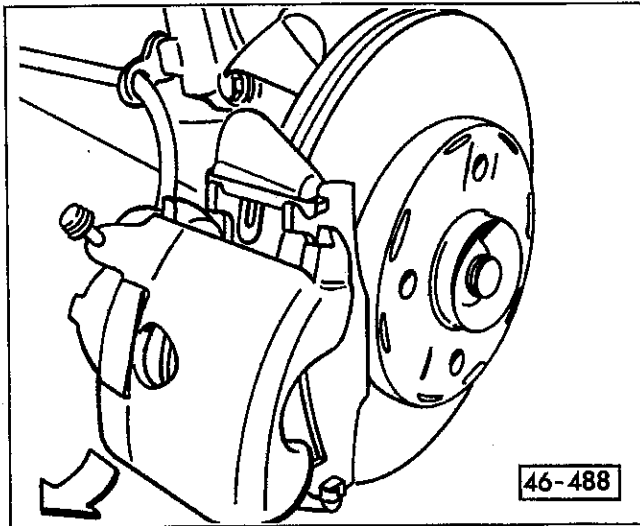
Caliper being removed from wheel bearing housing. Swing caliper out from bottom first.
